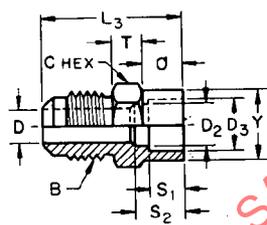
SOLDER CONNECTOR (HALF UNION)
